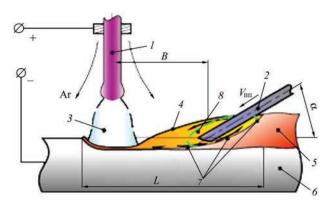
Scheme of adding modified flux-cored filler wire to the weld pool during electric arc surfacing [16]: 1, 2 — electrode and filler flux-cored wires; 3 — electric arc; 4 — weld pool; 5, 6 — deposited and base metals; 7 — deposited metal solidification front; 8 — overcooled zone of metal melt
